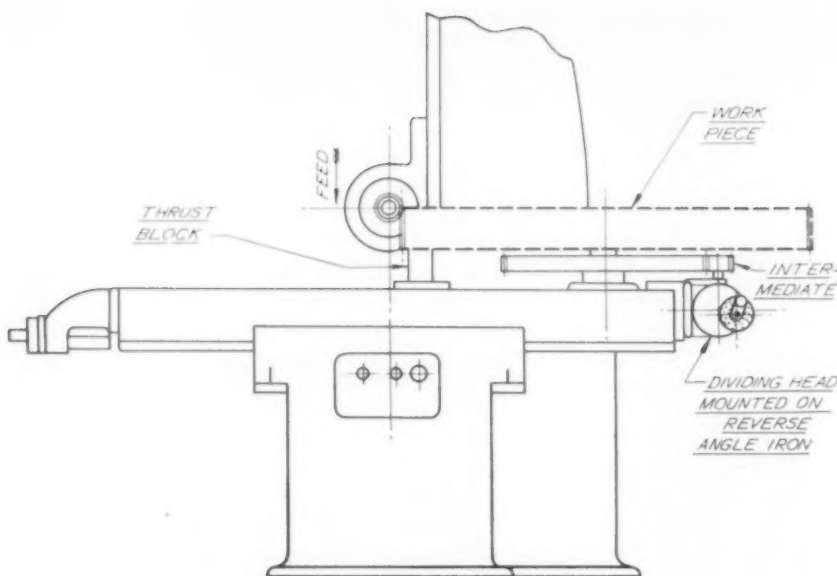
Cutting a large gear on a horizontal mill. See supplemental view in Figure 4.
